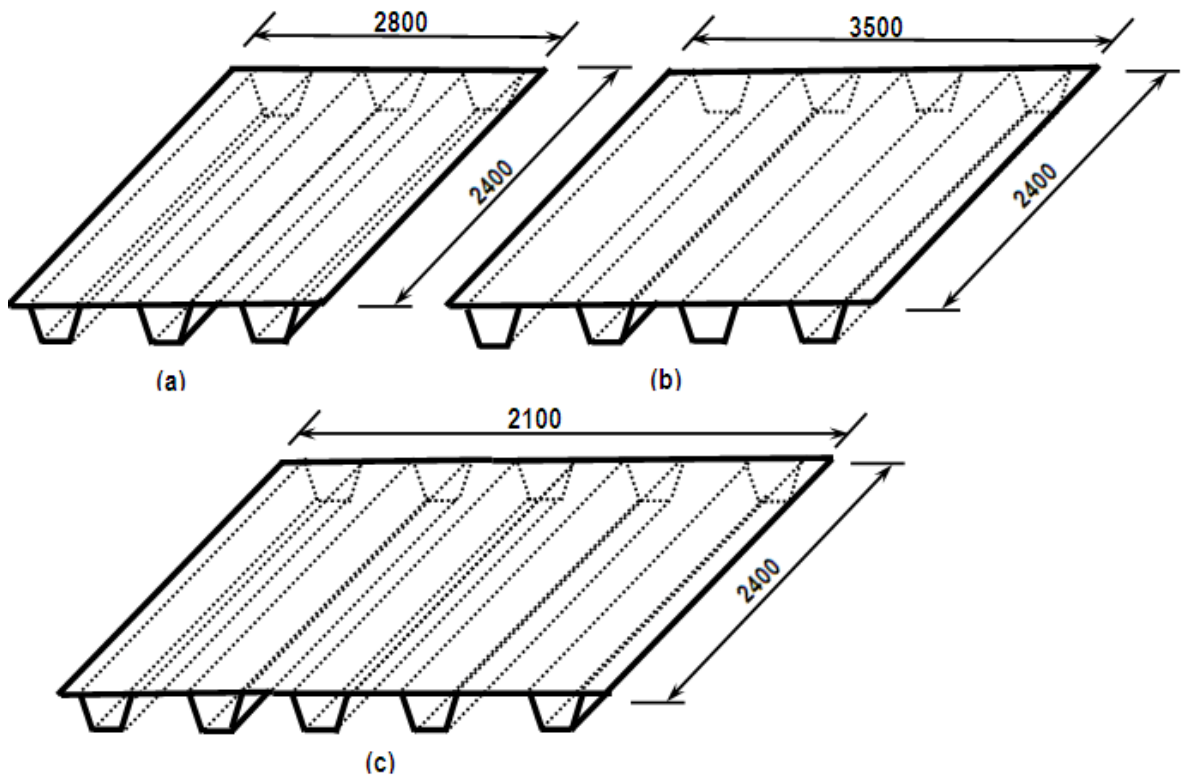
Geometry and dimensions of Hat Stiffened Plates having: (a) three stiffeners (b) four stiffeners and (c) five stiffeners.
